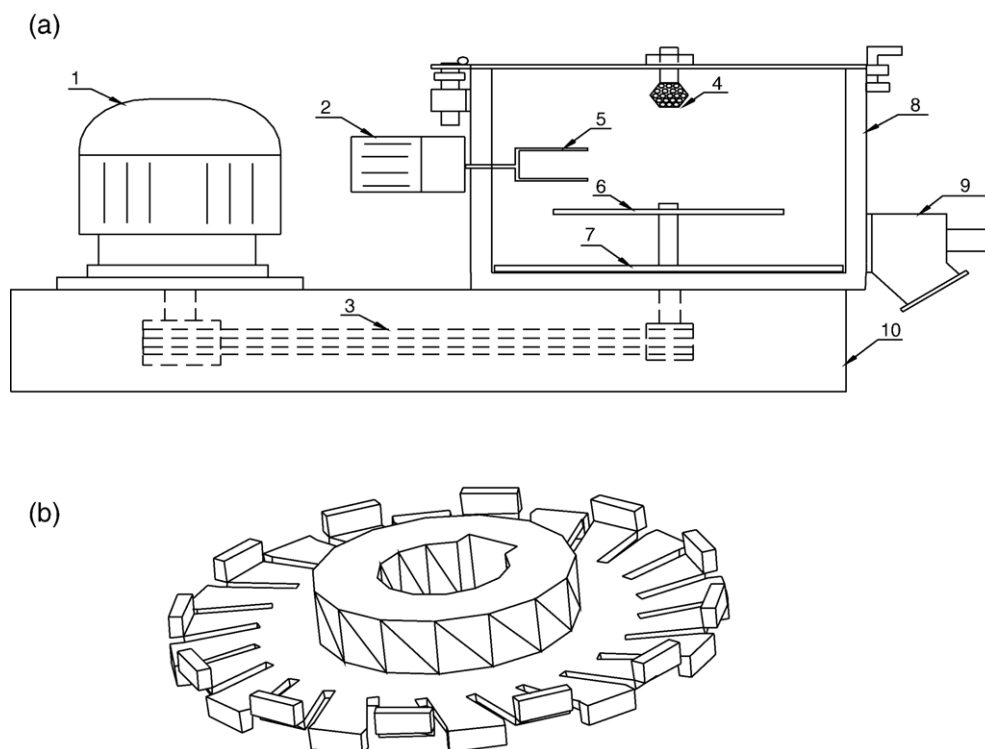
Structural illustration of ultra-high-speed mixer: (a) overall schematic, (b) shape of upper gear type blade wheel. (1) Main engine, (2) Engine for cutting tool, (3) Driving belt, (4) Atomization nozzle, (5) Cutting tool, (6) Upper blade wheel, (7) Lower blade wheel, (8) Mixing kettle, (9) Discharge, (10) Base.
